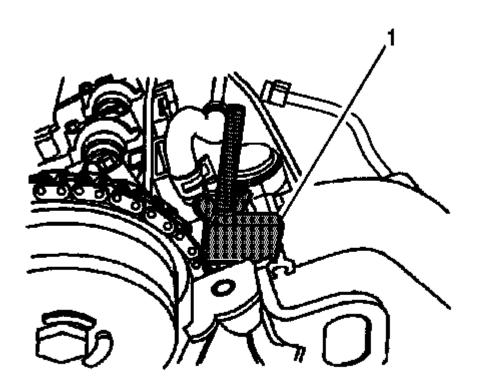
Crankshaft Locking Tool Courtesy of GENERAL MOTORS COMPANY
